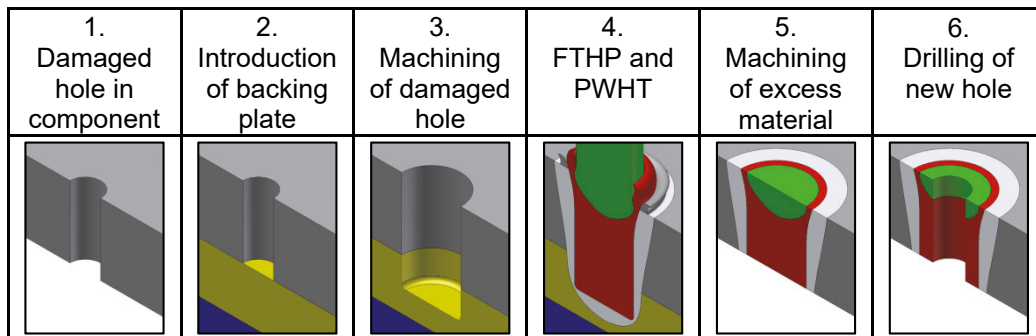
Stages in the FTHP repair of damaged turbine blade attachment finger holes in a LP rotor. Residual stress measurements were made on specimens representing stages 5 and 6 in both the as-welded and PWHT conditions.
